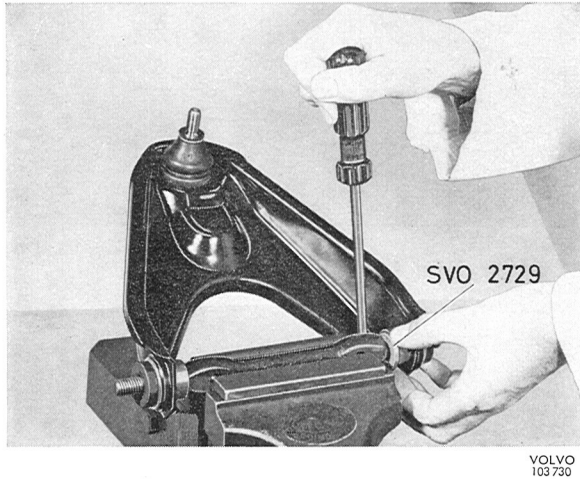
Removing control arm shaft. 1. Removal of tool 2729
